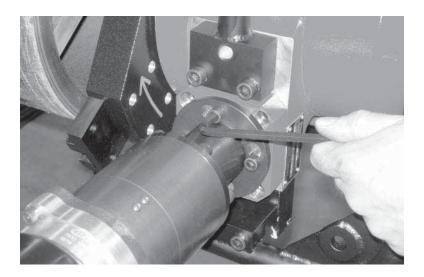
Turn the flange to seat the screws in the slots, then tighten the screws.
